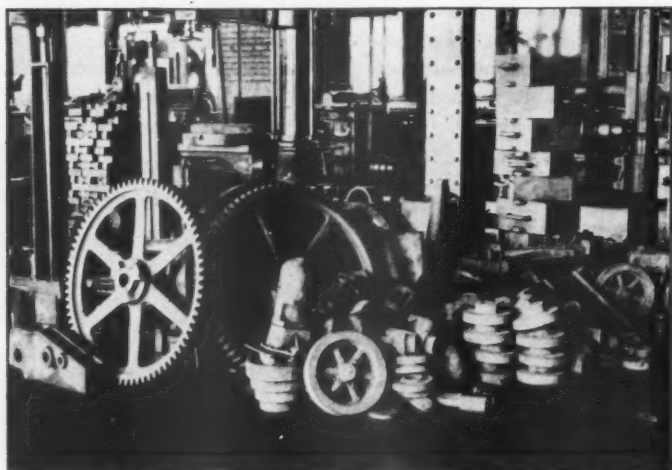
A GROUP OF CASTINGS IN THE MACHINE SHOP
